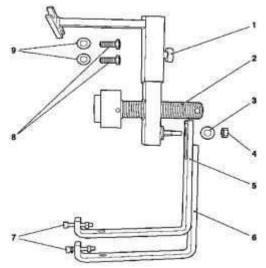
Device for removing and installing hard plates and driven clutch plate: 1 - pin 2 - retractors, 3 - Disc 4 - nut, 5 - KM-6263-4 (short arm), 6 - KM-6263-5 (the long arm), 7 - lower bolt engine block, 8 - upper bolt engine block; 9 - Puck
